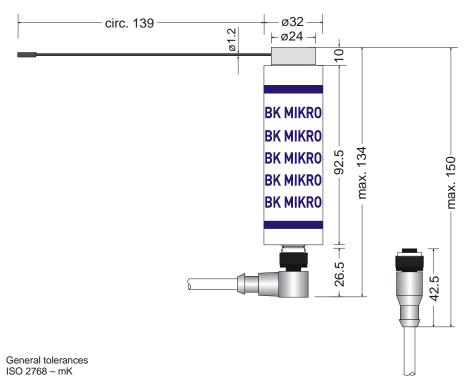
Mechanical Dimensions – Scanner TK94A
